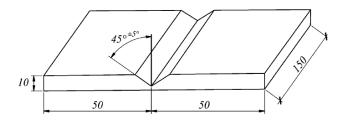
Welded joint test assembly for cutting out specimens to be tested for resistance to ICC
